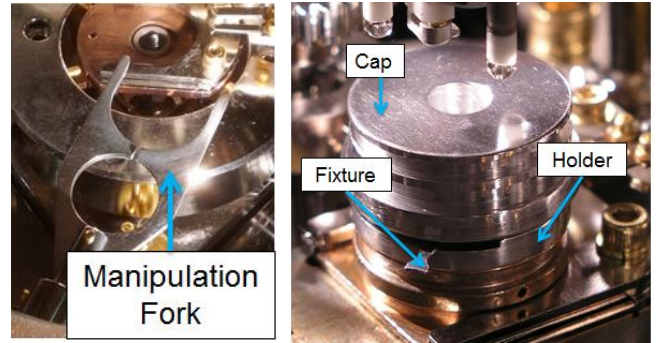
Manipulation fork. Figure 15: Complete assembly.
